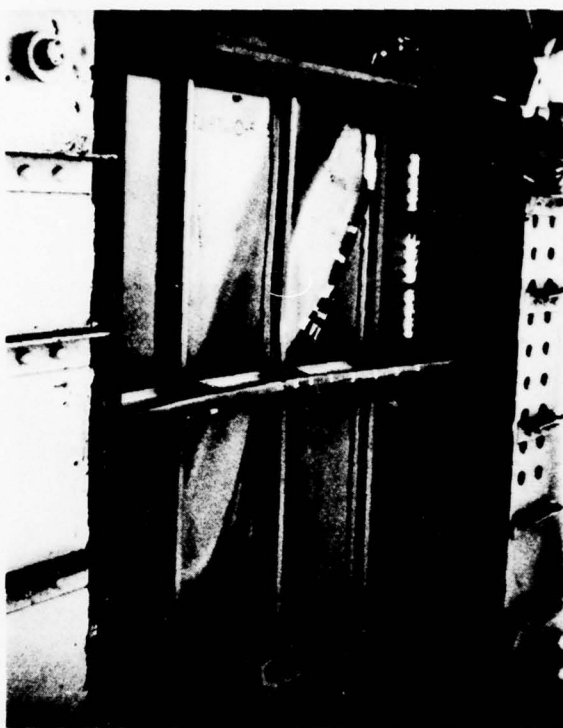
BONDED SHEAR PANEL FAILURE - BACK VIEW
